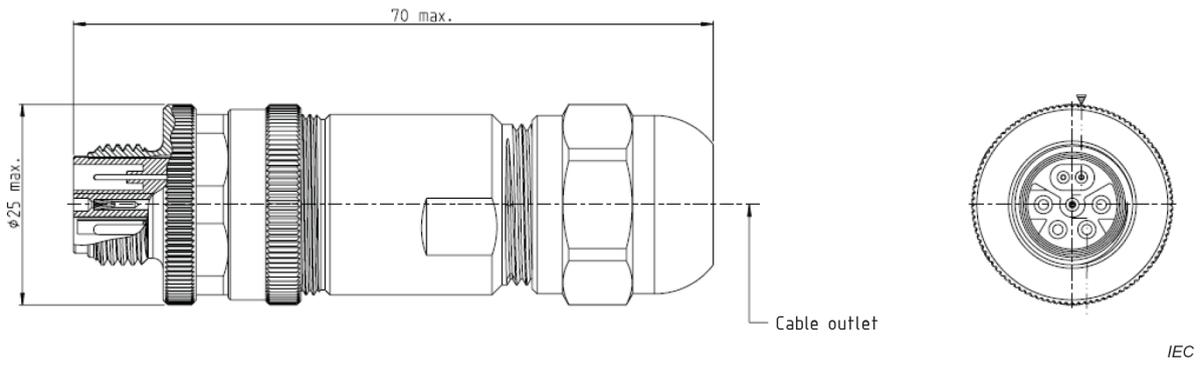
Styles 6P-P12C and 6P-M12C overall dimensions
